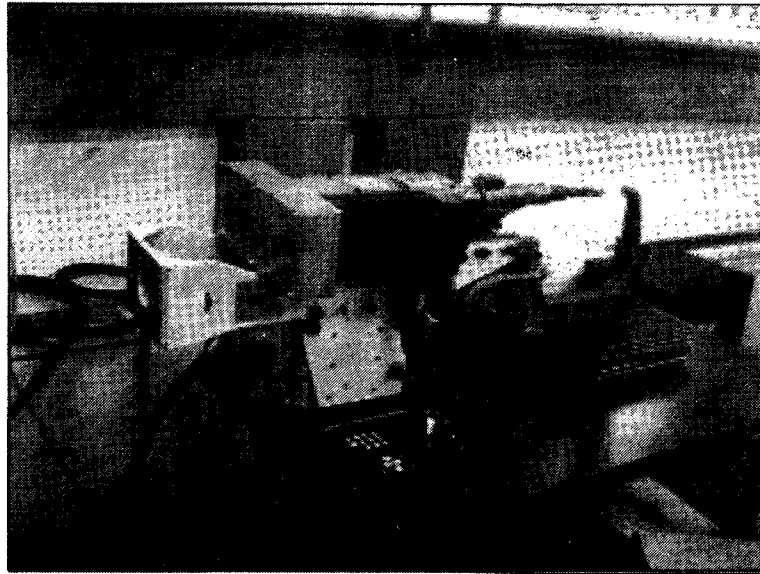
Resistance Spot Welding System using Servo-Gun
